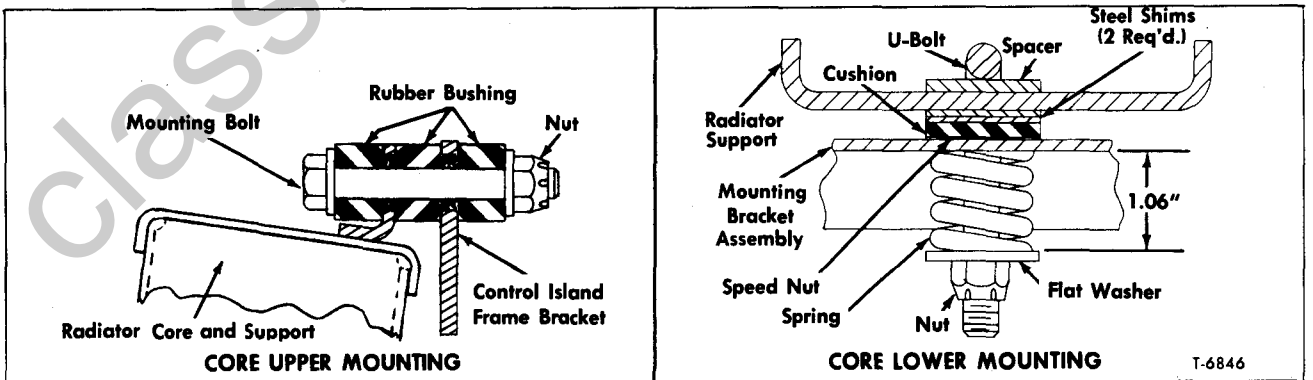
Radiator Upper and Lower Mounting (Series 70-80 Steel Tilt Cab) (Typical)
